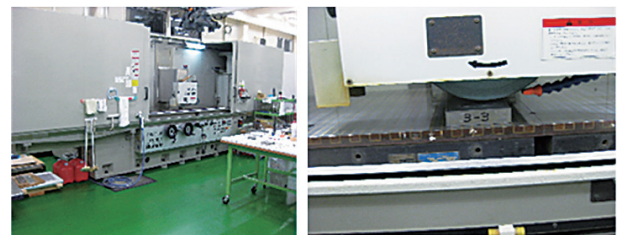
Pictures of the surface grinding machine and the polishing of the 6N-tungsten foil.
